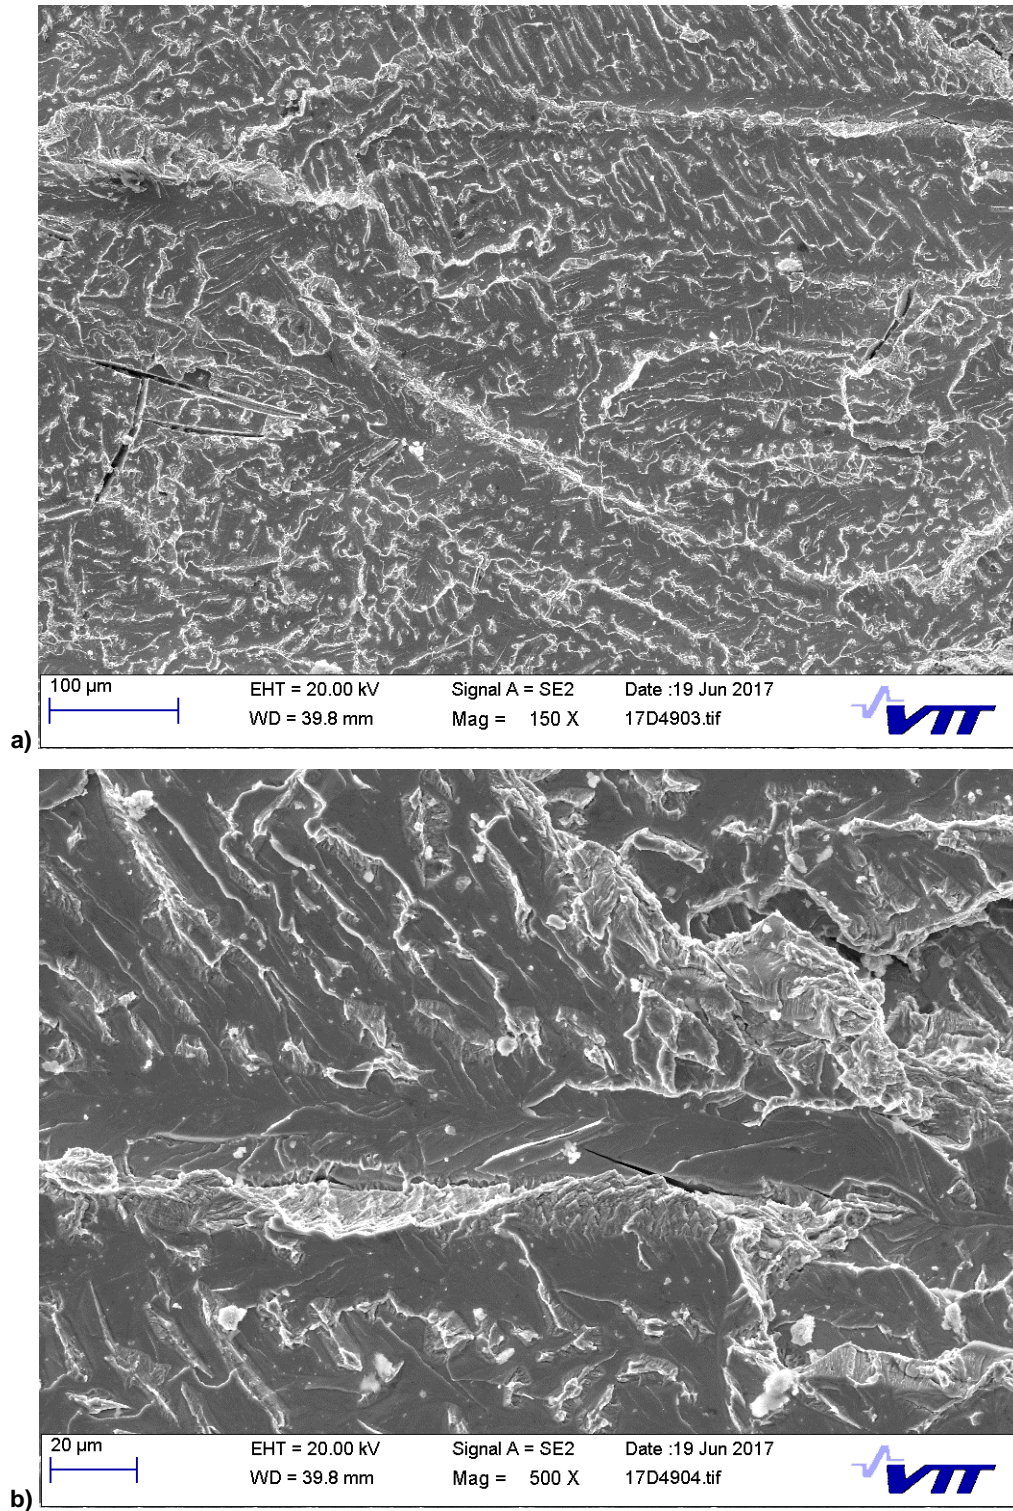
Fracture surface near the plate outer surface, showing “flat” fracture and side cracks. (a) Outer surface on top, fracture propagation from top to bottom; (b) detail of the fracture surface in (a).
